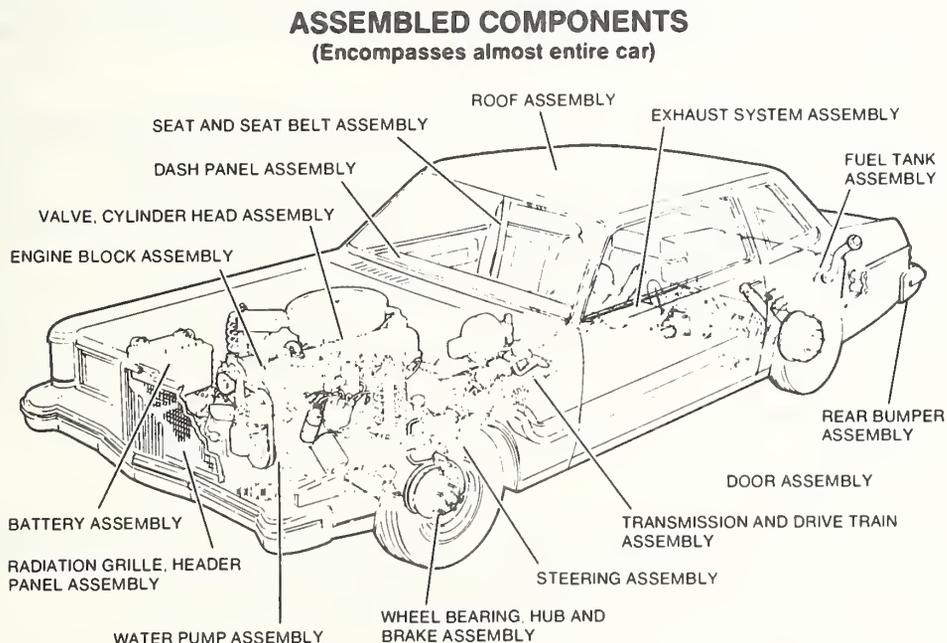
SCHEMATIC DIAGRAM OF AUTOMOBILE SHOWING PART AND COMPONENTS WHICH ARE ASSEMBLED
